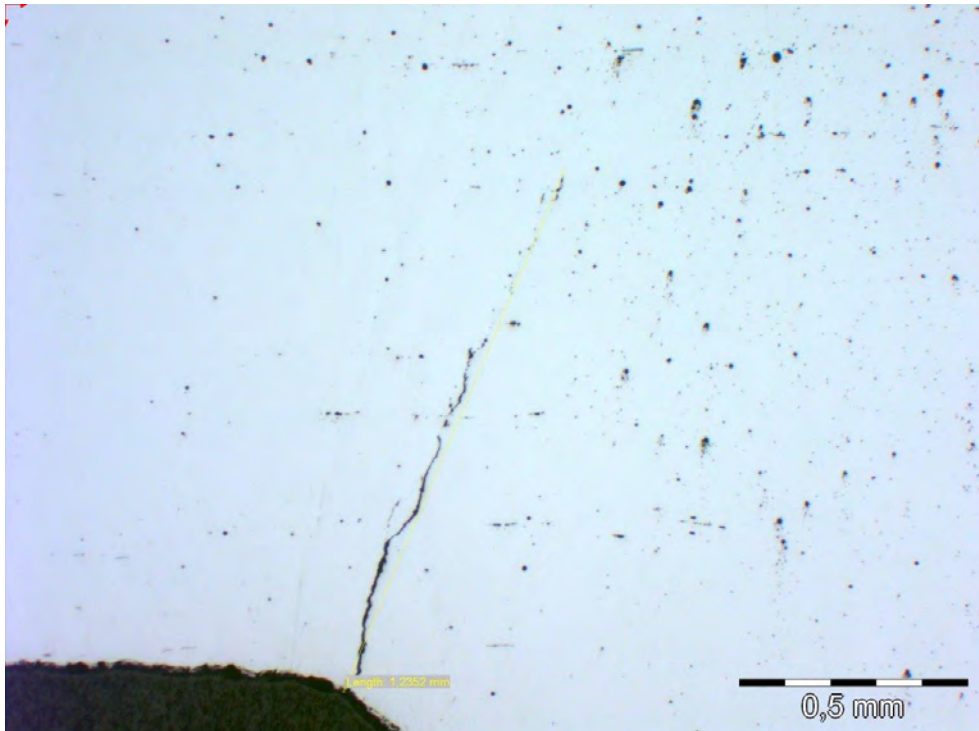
Cut four in crack at segment A, first ridge on barrel no. 14389
